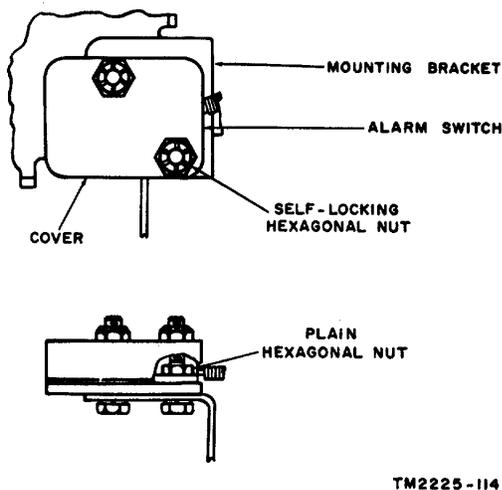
Tape-out alarm preliminary adjustment (TT-76A/GGC and later models).
